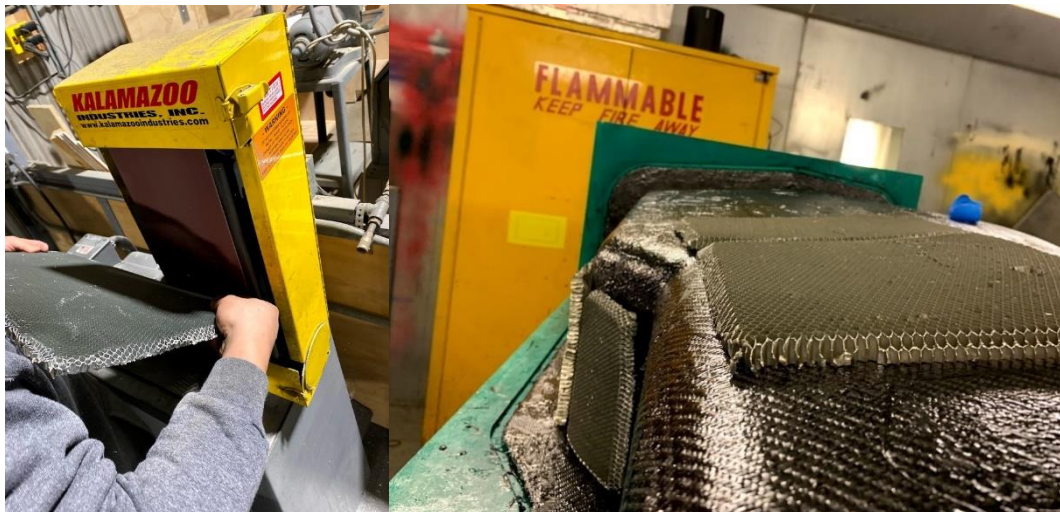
Beveling the core using a sander (left), beveled core on skin (right).
